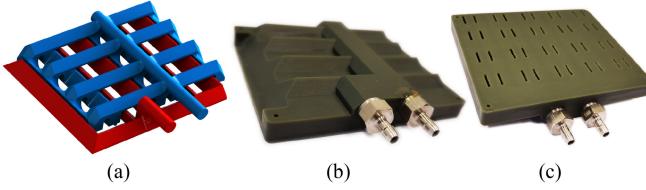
Manifold of 3-D print. (a) CAD model of the flow path inside the manifold. Blue and red regions indicate the cold and hot water flow, respectively. (b) Top side of the manifold after 3-D printing. (c) Bottom of the manifold which shows the slits that connect the manifold to the microchannel cold plates.
